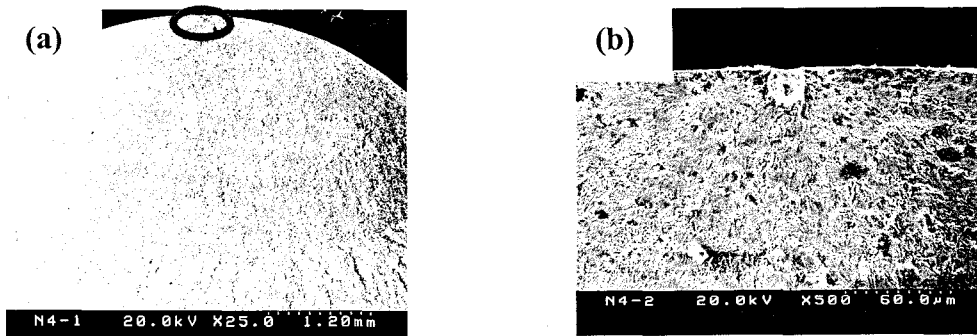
SEM micrographs of fracture surface of surface-originating fracture before the UCFT; (a) lower magnification view and (b) enlargement of crack initiation site
